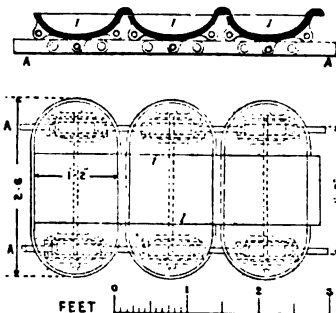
Delivery Point of "Ramsay" Casting Machine.
